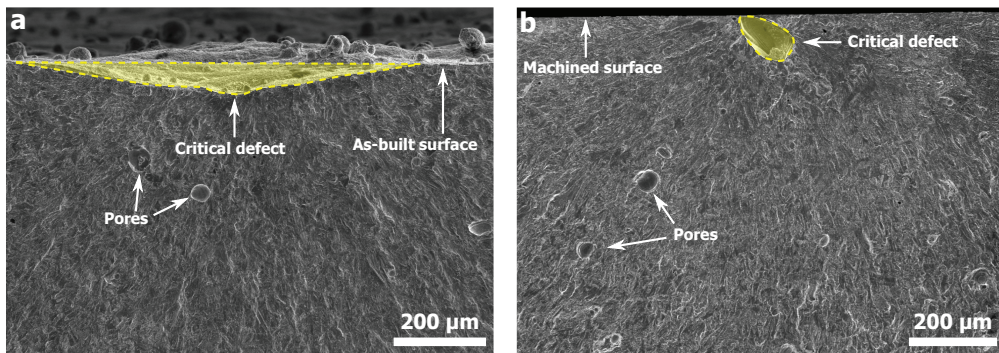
Examples of two fracture surfaces of 18Ni300 specimens failing from fatigue. (a) As-built surface (b) machined surface
